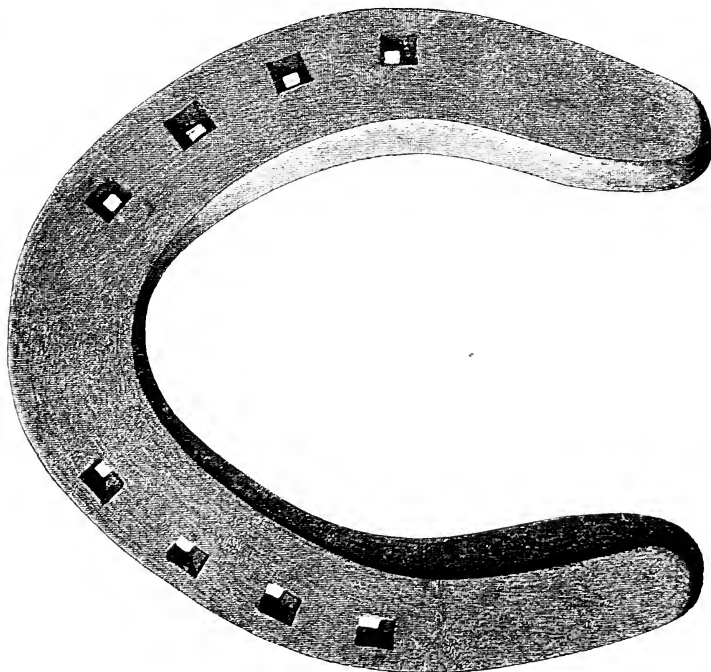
Cart horse stamped hind shoe (for show purposes).
